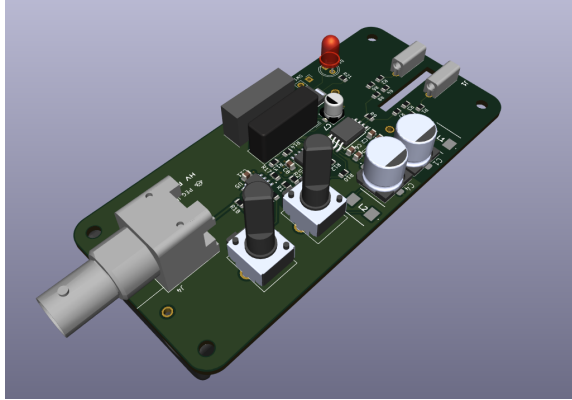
Optimized layout with all-SMD components, clearance distances and compact design
